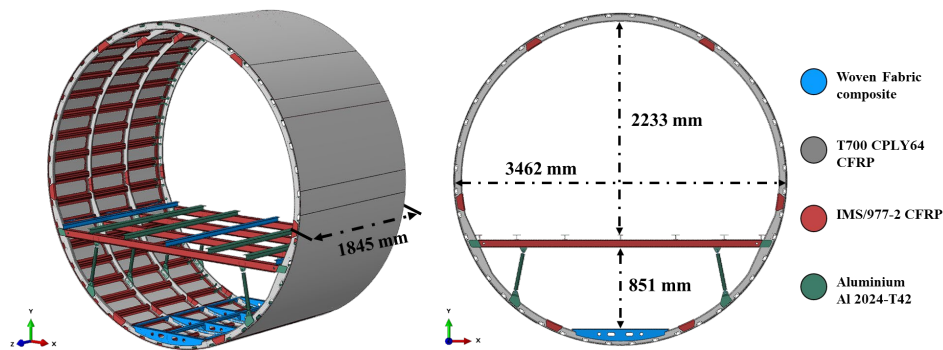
Fuselage barrel FE model and dimensions: a) isometric view; b) frontal view
